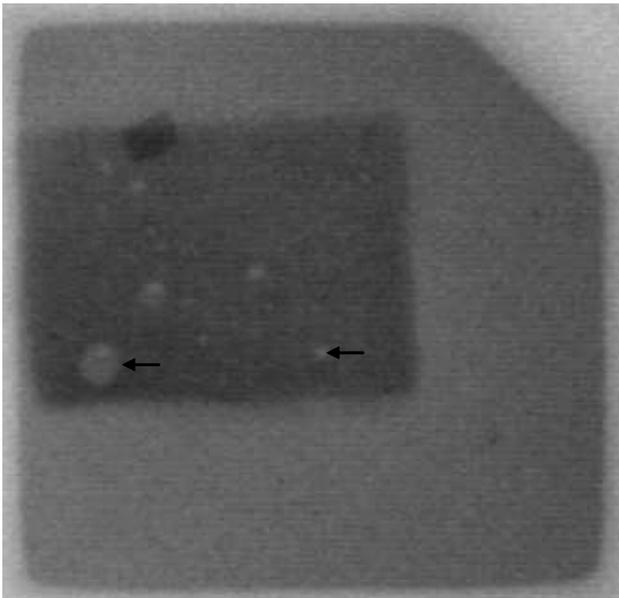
X-ray image of die with edge seal process following solder paste assembly. Arrows indicate solder voids that corresponded to backside (through-substrate) vias.
